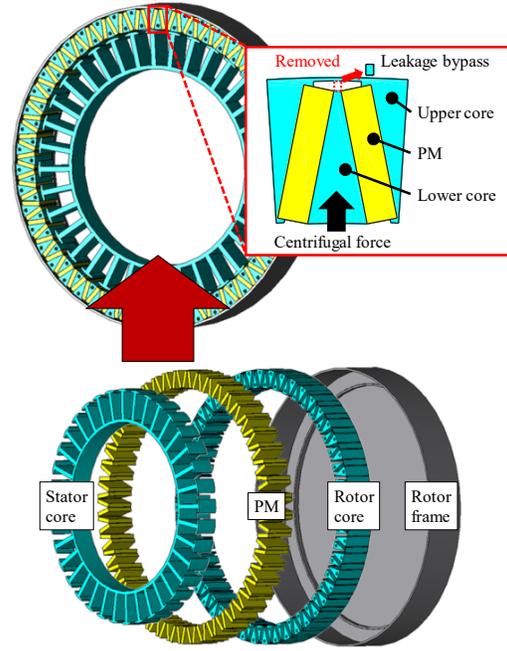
Detailed configuration of the V-shaped PM arrangement
